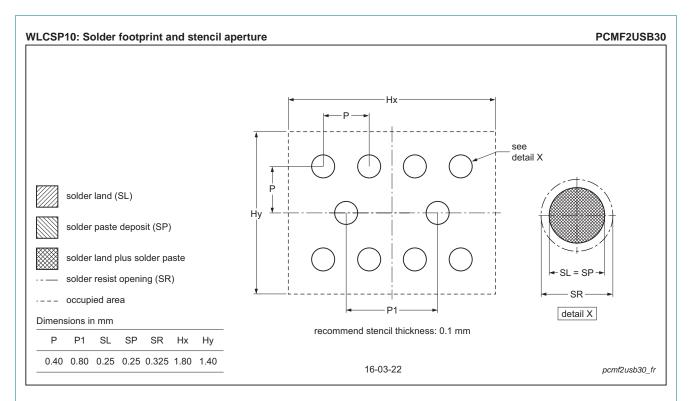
Soldering footprint WLCSP10 (PCMF2USB30)
